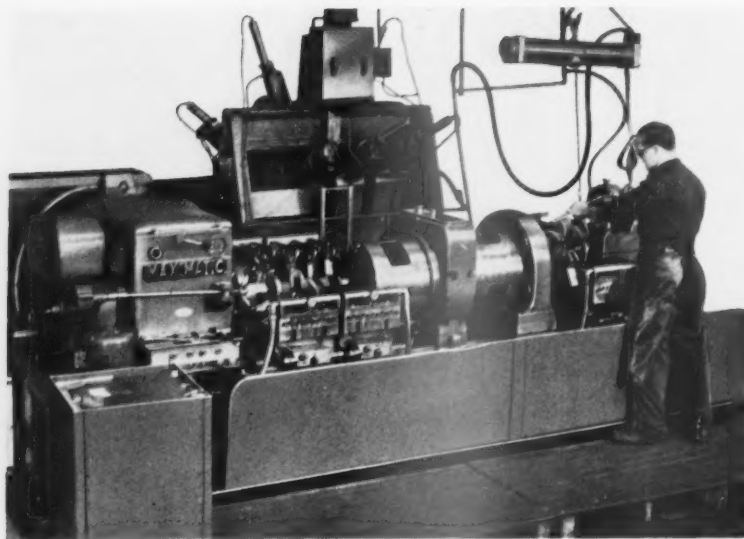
Drummond Maximatic centre drive lathe for turning all main journals, web faces and bevels and timing wheel and flange diameters
